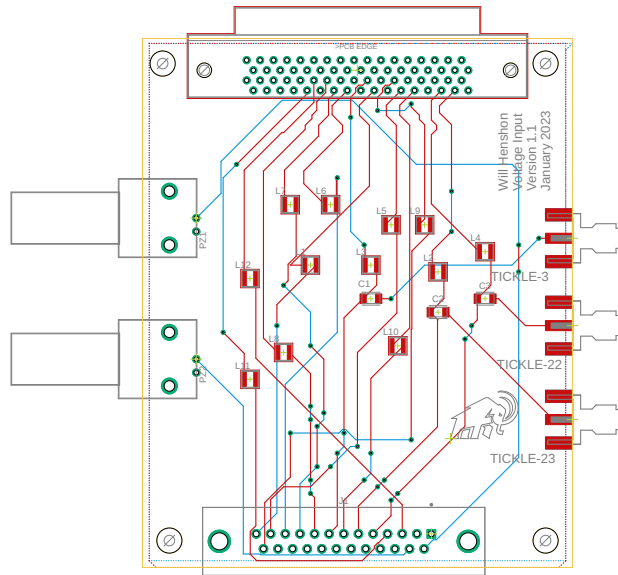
Design of the completed PCB for the auxiliary circuit. Dimensions of the board are 7.54 cm x 10.16 cm.
